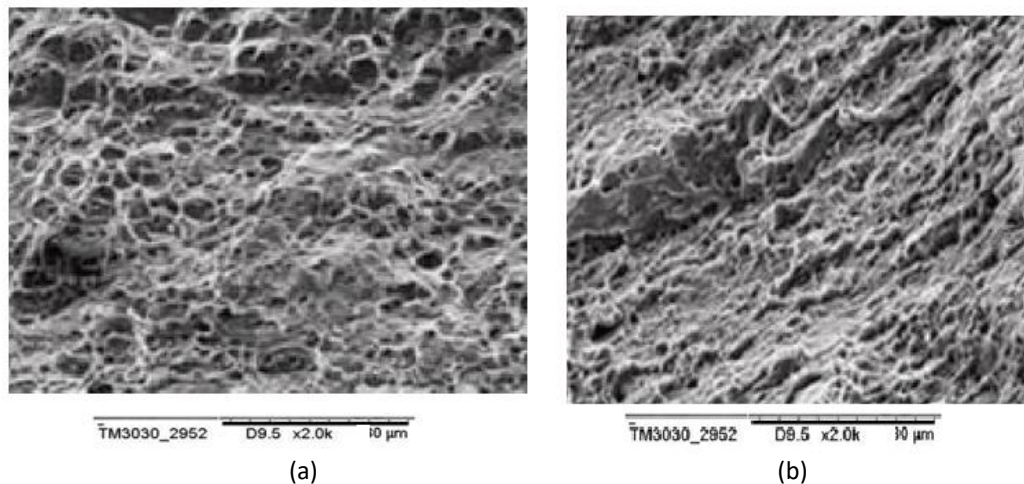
(a, b) SEM images of fracture surfaces of tensile-tested (FSW) joints
